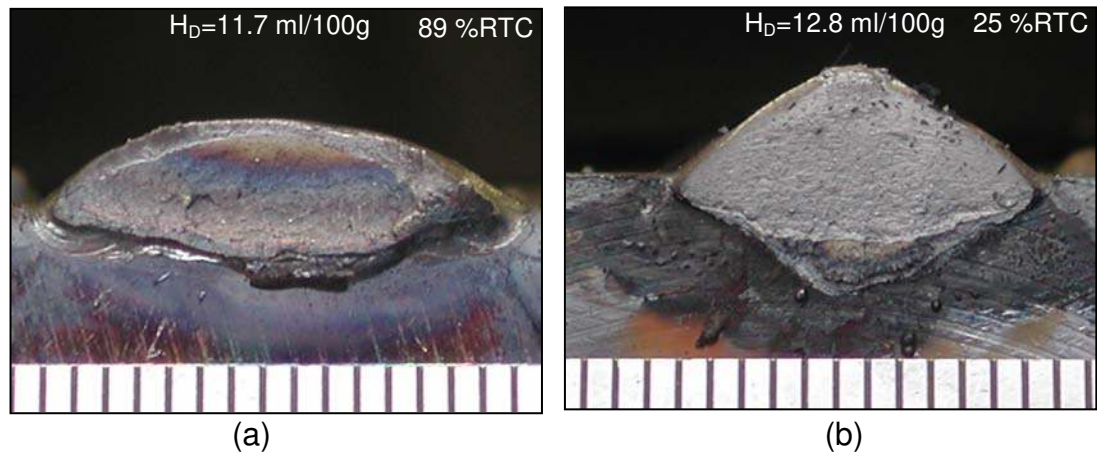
7 Photographs showing the G-BOP fracture faces of H10 weld metal deposits at preheat temperature of 20 °C using CO<sub>2</sub> shielding gas, CTWD of 15 mm and welded using welding of (a) 280 A and (b) 320 A.
